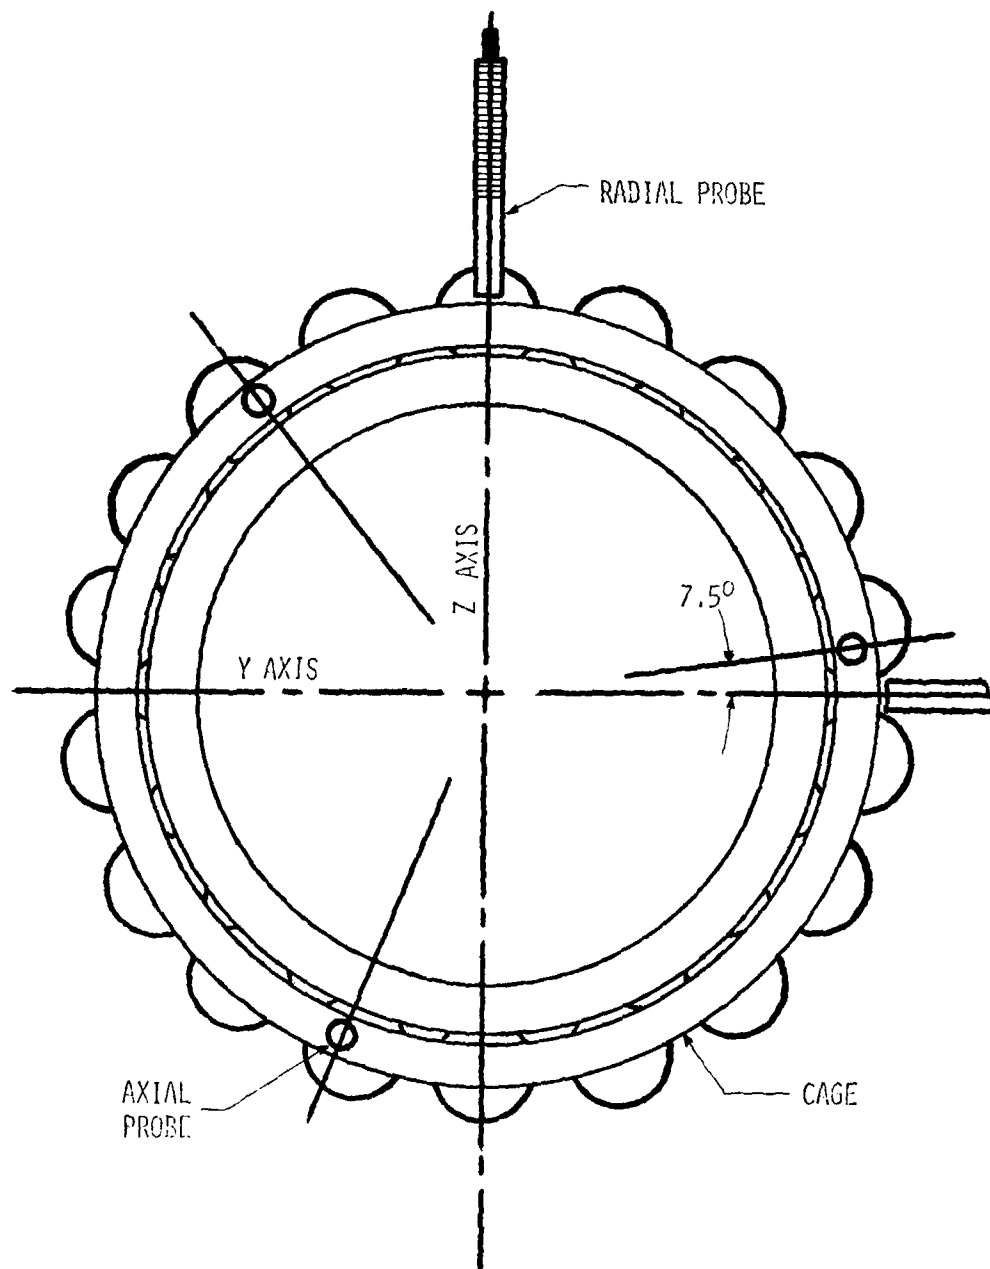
Axial View, Probe Locations (Outer Ring of Peering not Shown).
